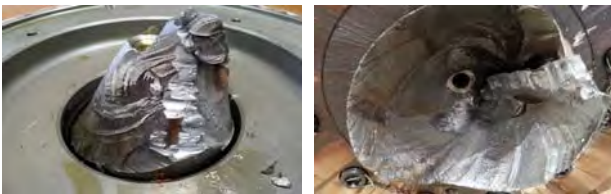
Typical cup and cone type torsion fatigue fracture of clutch shaft
